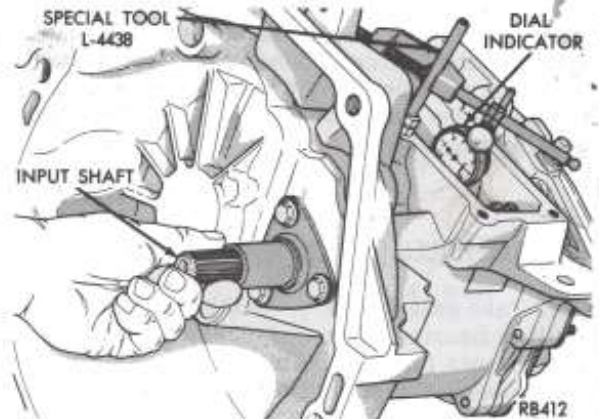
Checking Input Shaft Bearing End Play to Determine Shim Thickness
